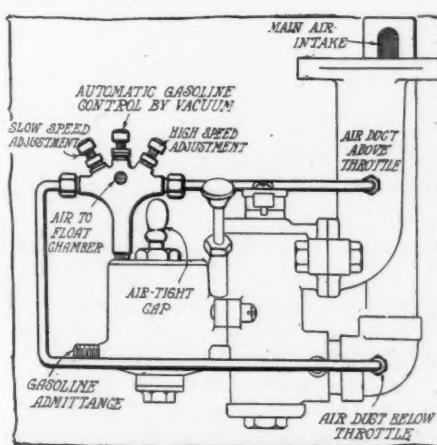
THE BINGHAM COMPENSATOR ATTACHED TO A CARBURETOR
